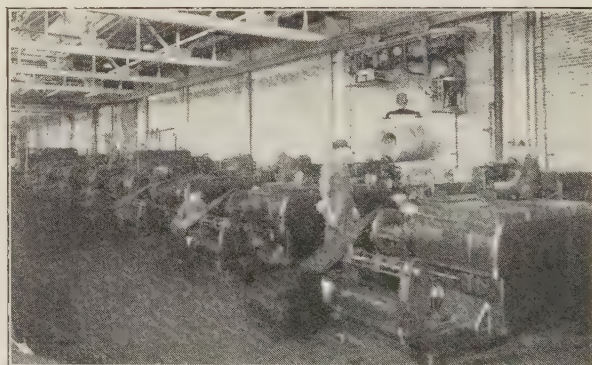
BATTERY OF NO. 1 WIRE-DRAWING MACHINES
